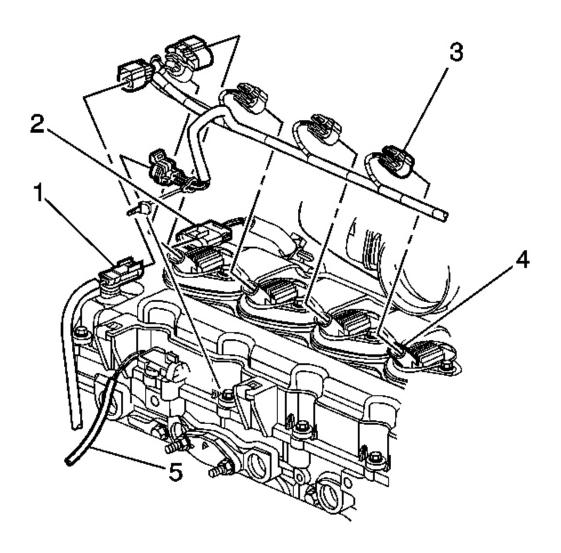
View Of ECT Sensor, Fuel Injector, Ignition Coil & HO2S Engine Wiring Harness Electrical Connectors
